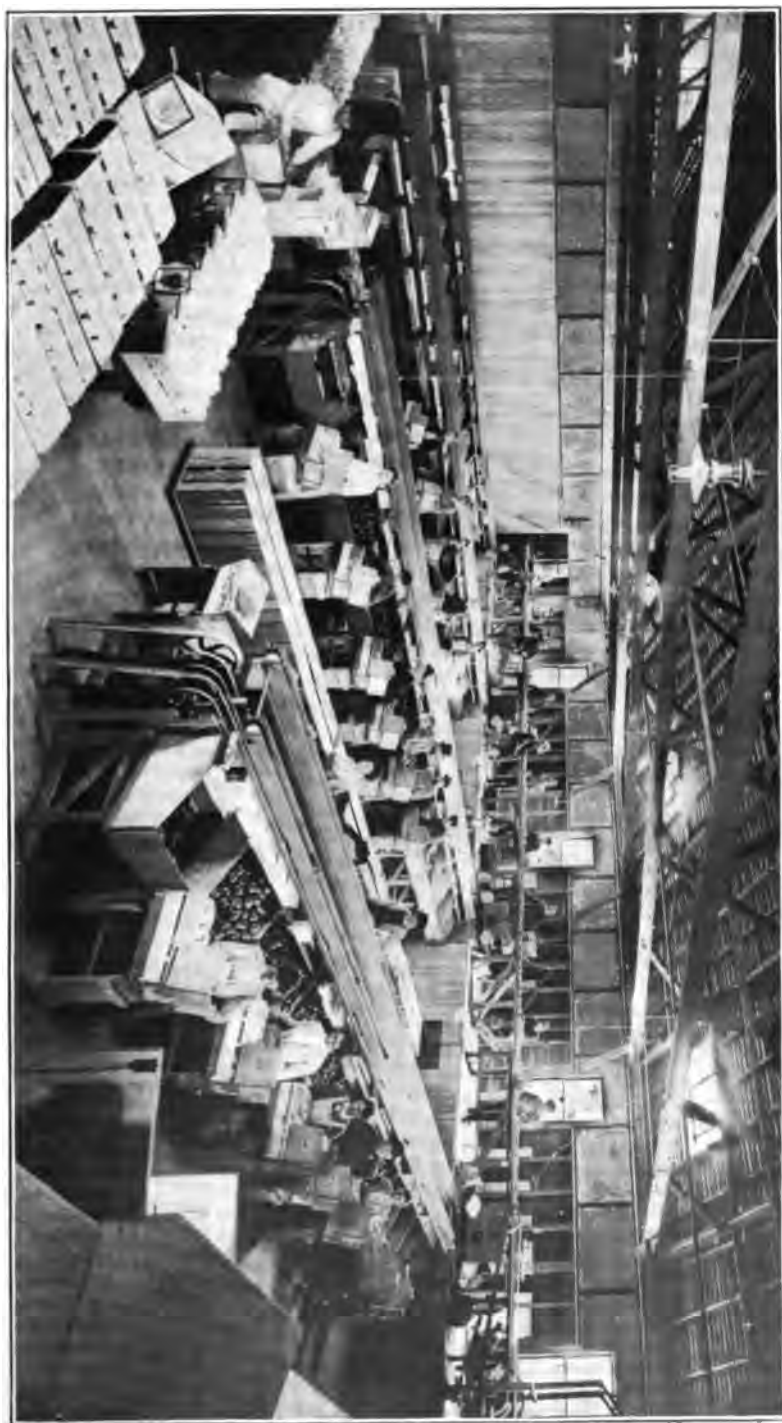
A BELT-CARRYING DEVICE OVER A BRUSHING MACHINE.
